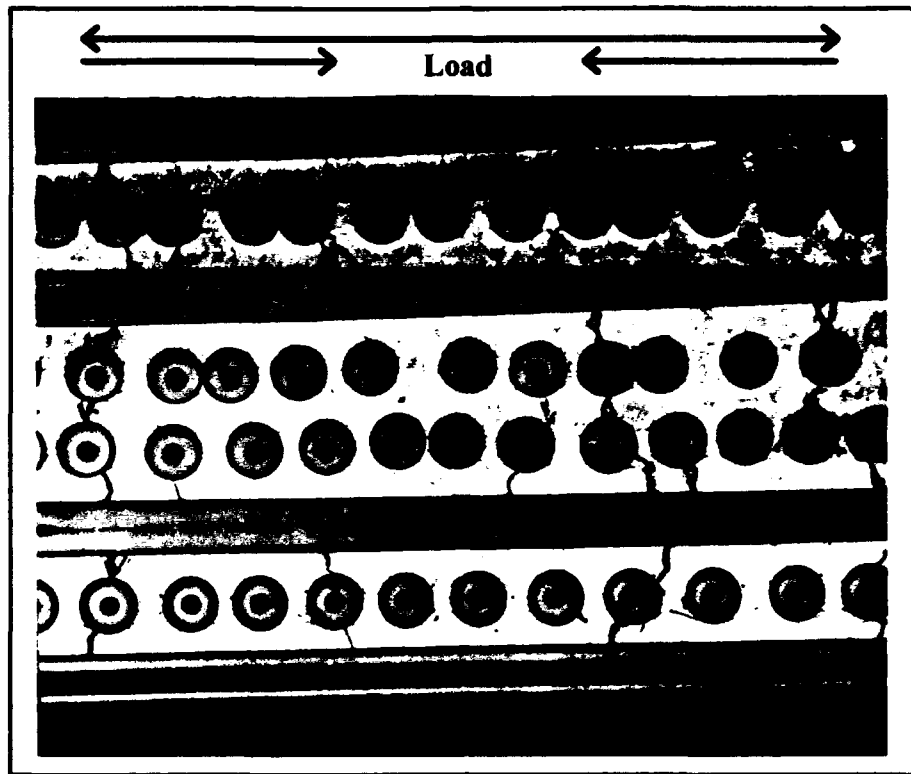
175 TC RT: Specimen Edge After Failure (50x)
